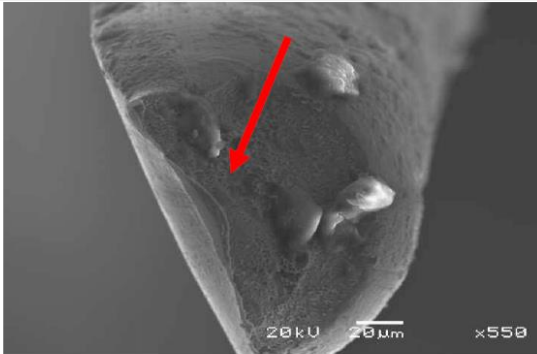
Fractograph showing typical outer strand wire fracture geometry (x550, SEM)
